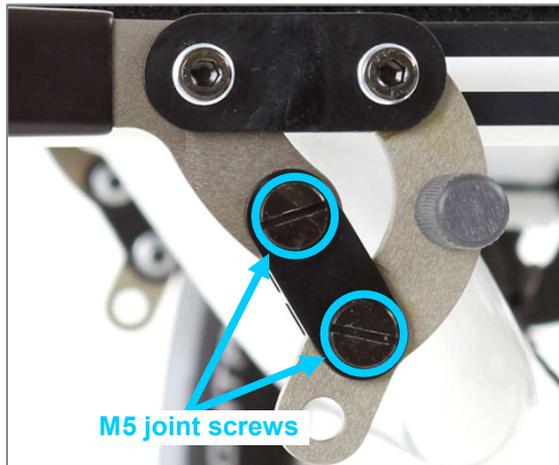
M5 joint screws for setting the actuating force of the brake lever
